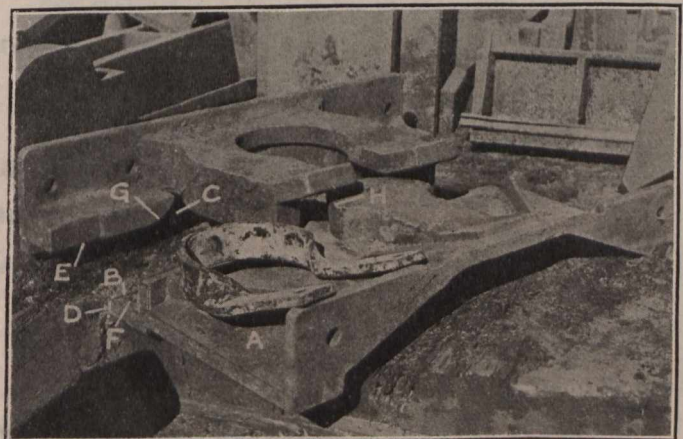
Bulldozer Dies for Brake-rod Stands.
